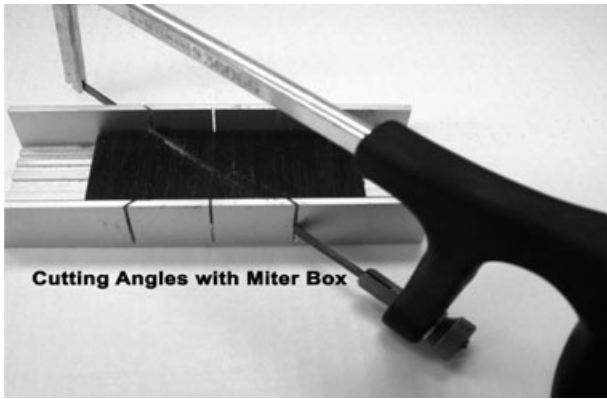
Preparing hacksaw tool marks by cutting a piece of jewelry modeling wax with the exemplar saw and the aid of a miter box.
